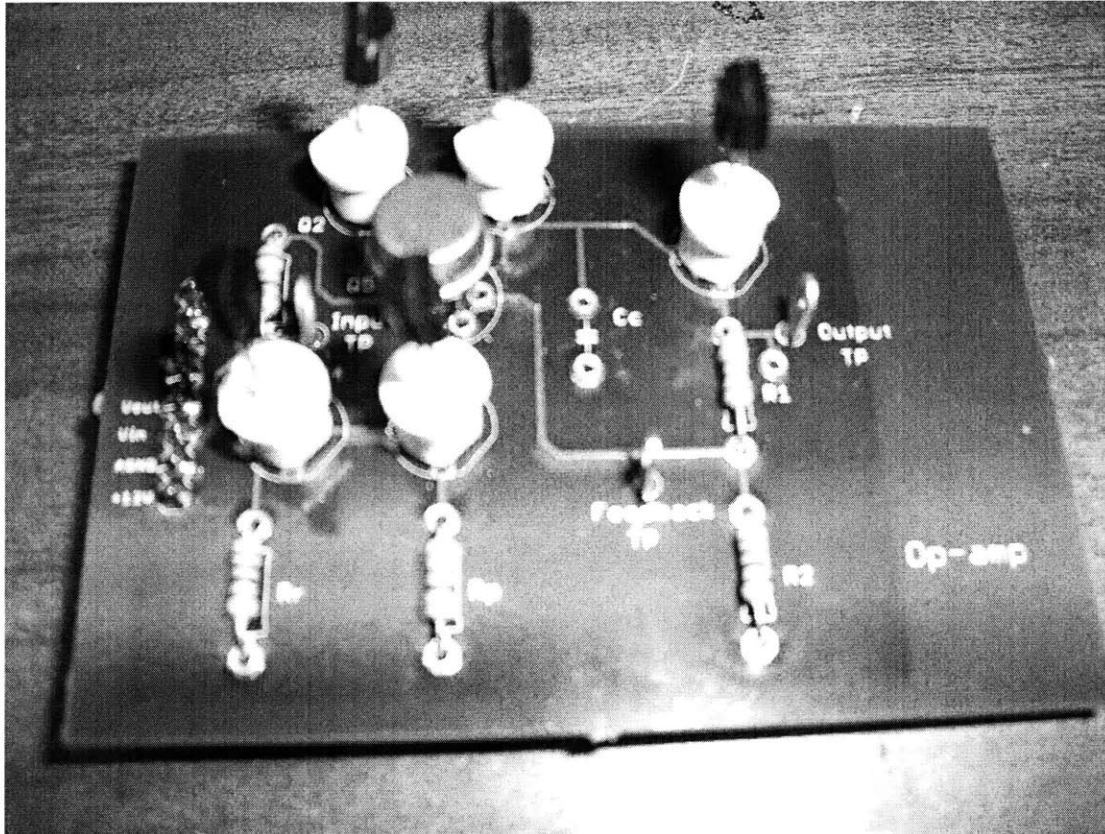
Typical 3" x 2" module that plugs in to the large board.
